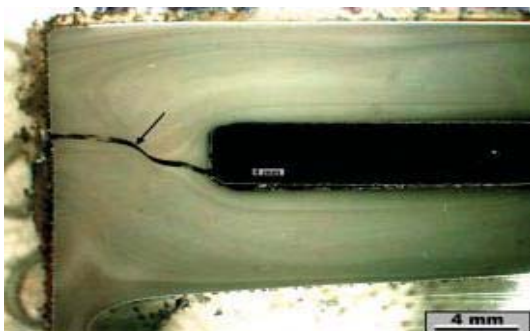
Cross section showing fracture along the knit line of a perfluoralkoxyethylene-lined impeller. [1]
